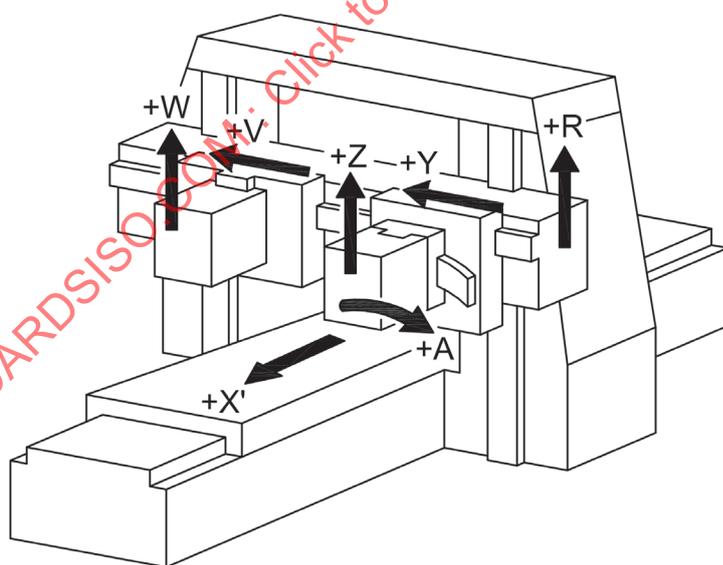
Example of a double column bed-type milling machine (portal milling machine)
